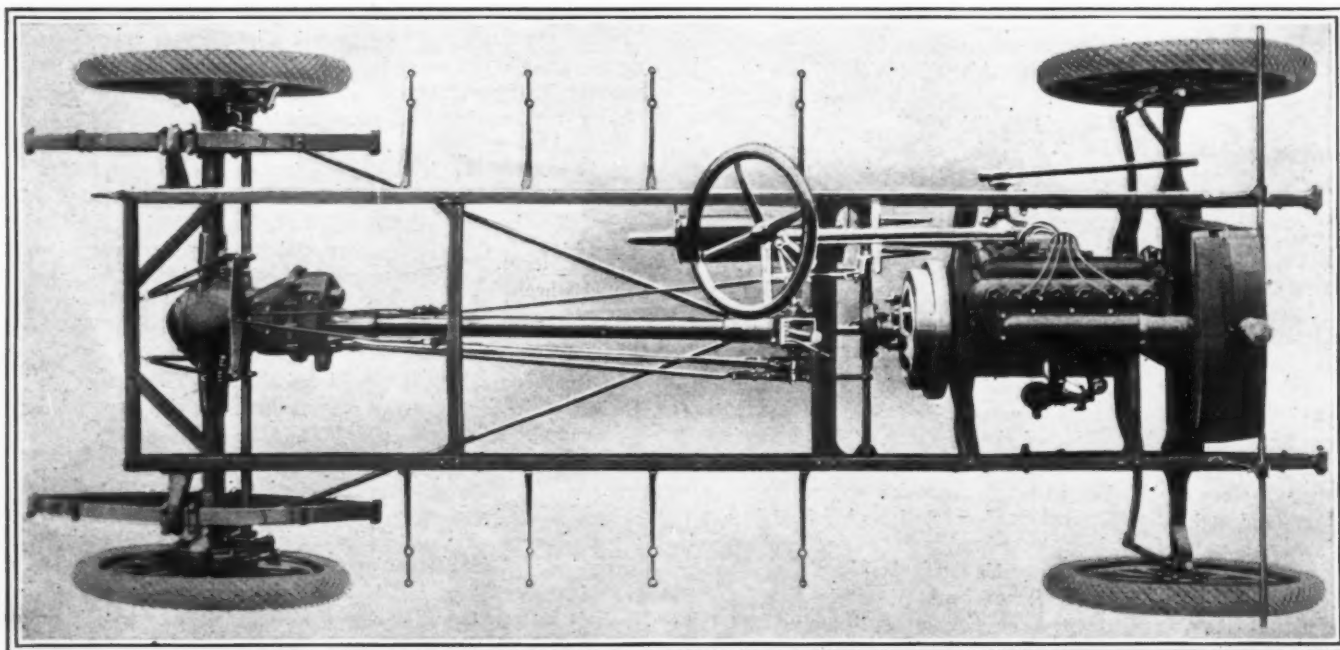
Plan view of chassis, showing motor suspension, torque arrangements and principal control features
